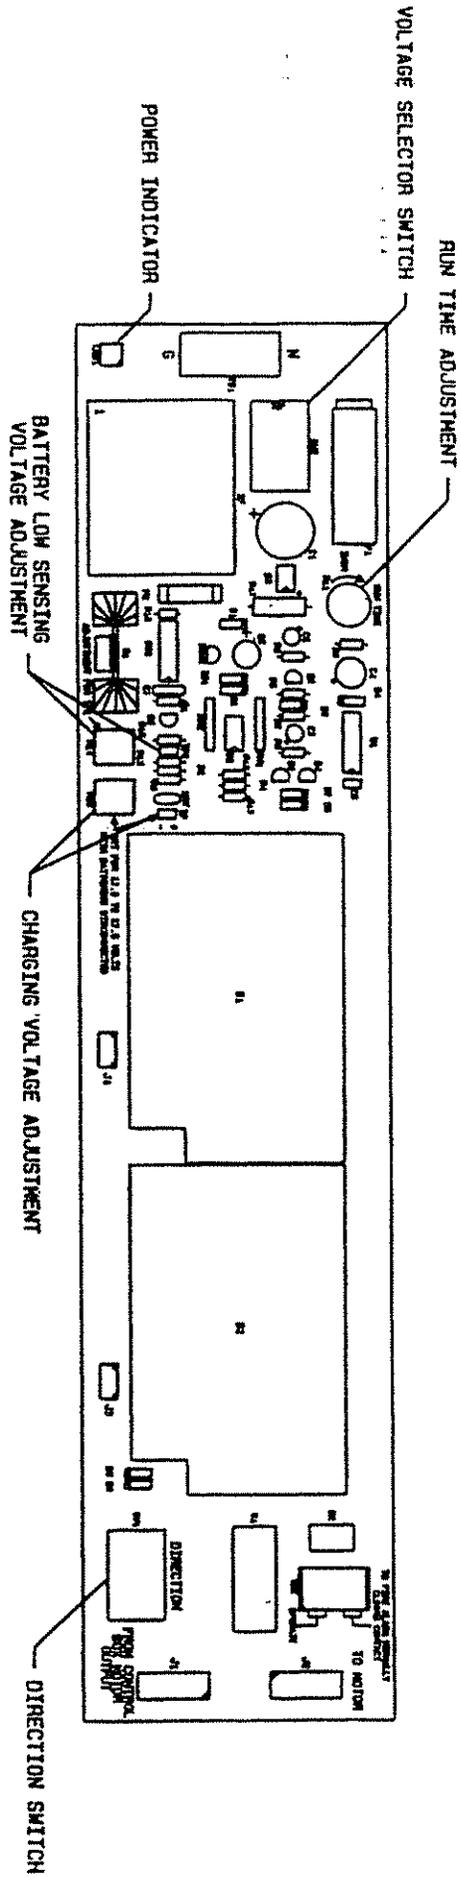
ADJUSTMENT AND SWITCH LOCATIONS
